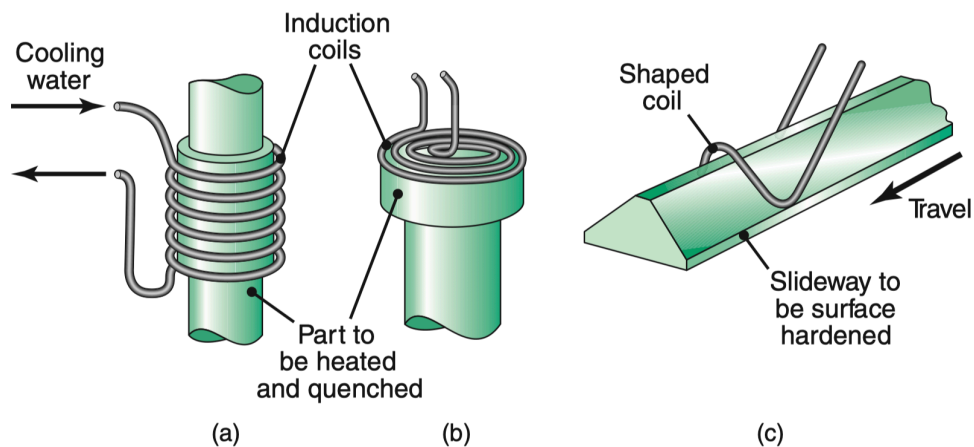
Types of coils used in the induction heating of various surfaces of parts.
